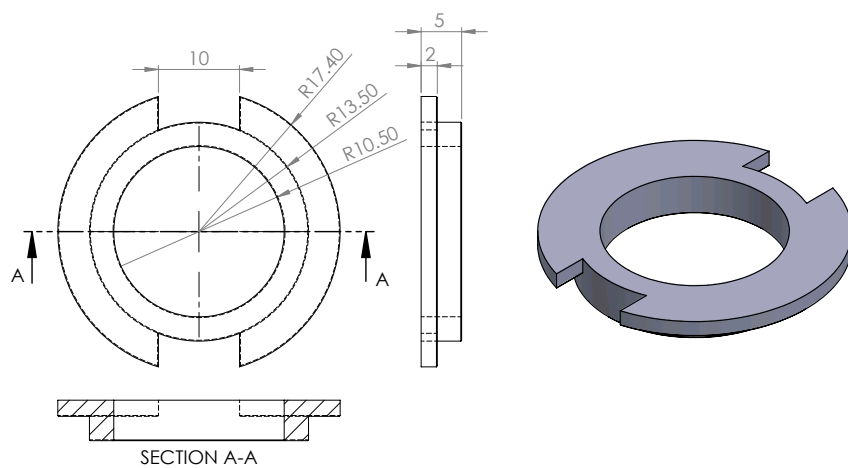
Engineering drawing of the PDMS ring used to segment the wells. Dimensions are in mm.
